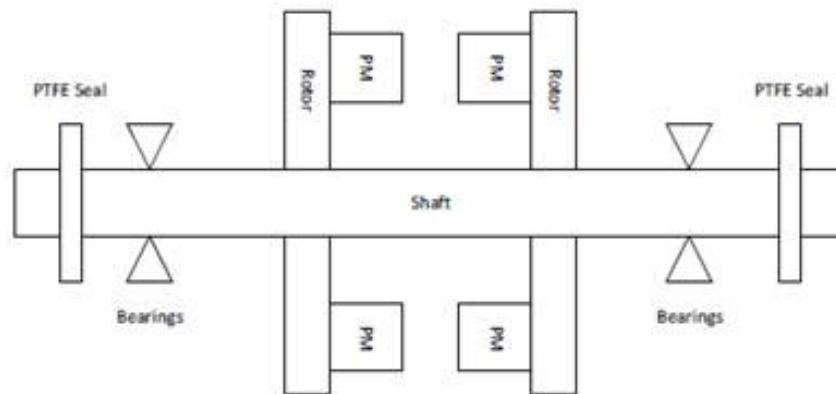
Sketch of shaft configuration showing the main weights and support mechanism
